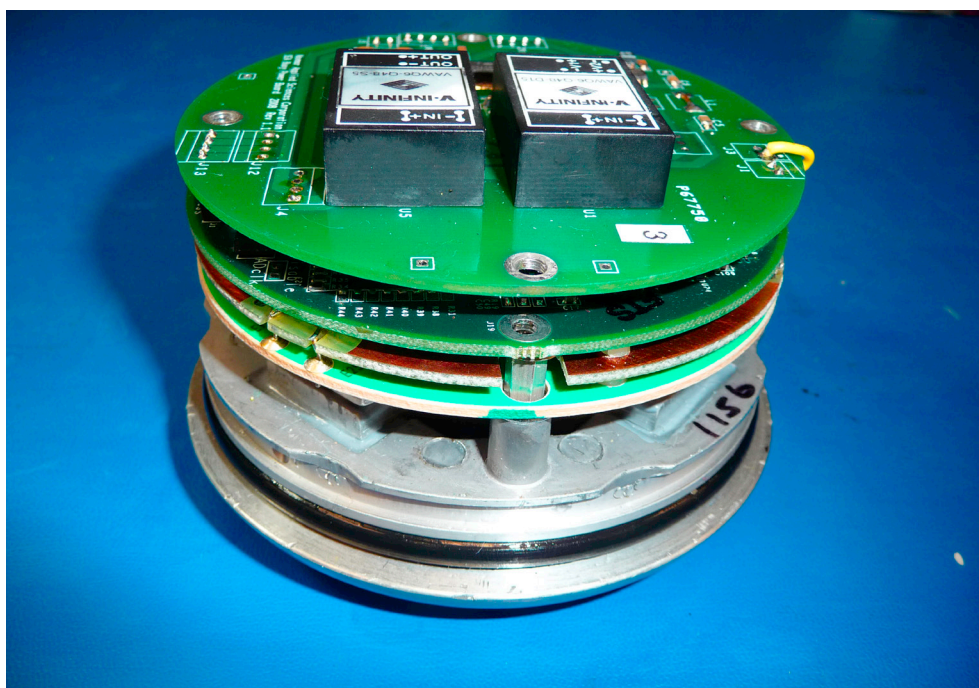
Lower Electronics Circuit Boards Mounted in Canister
